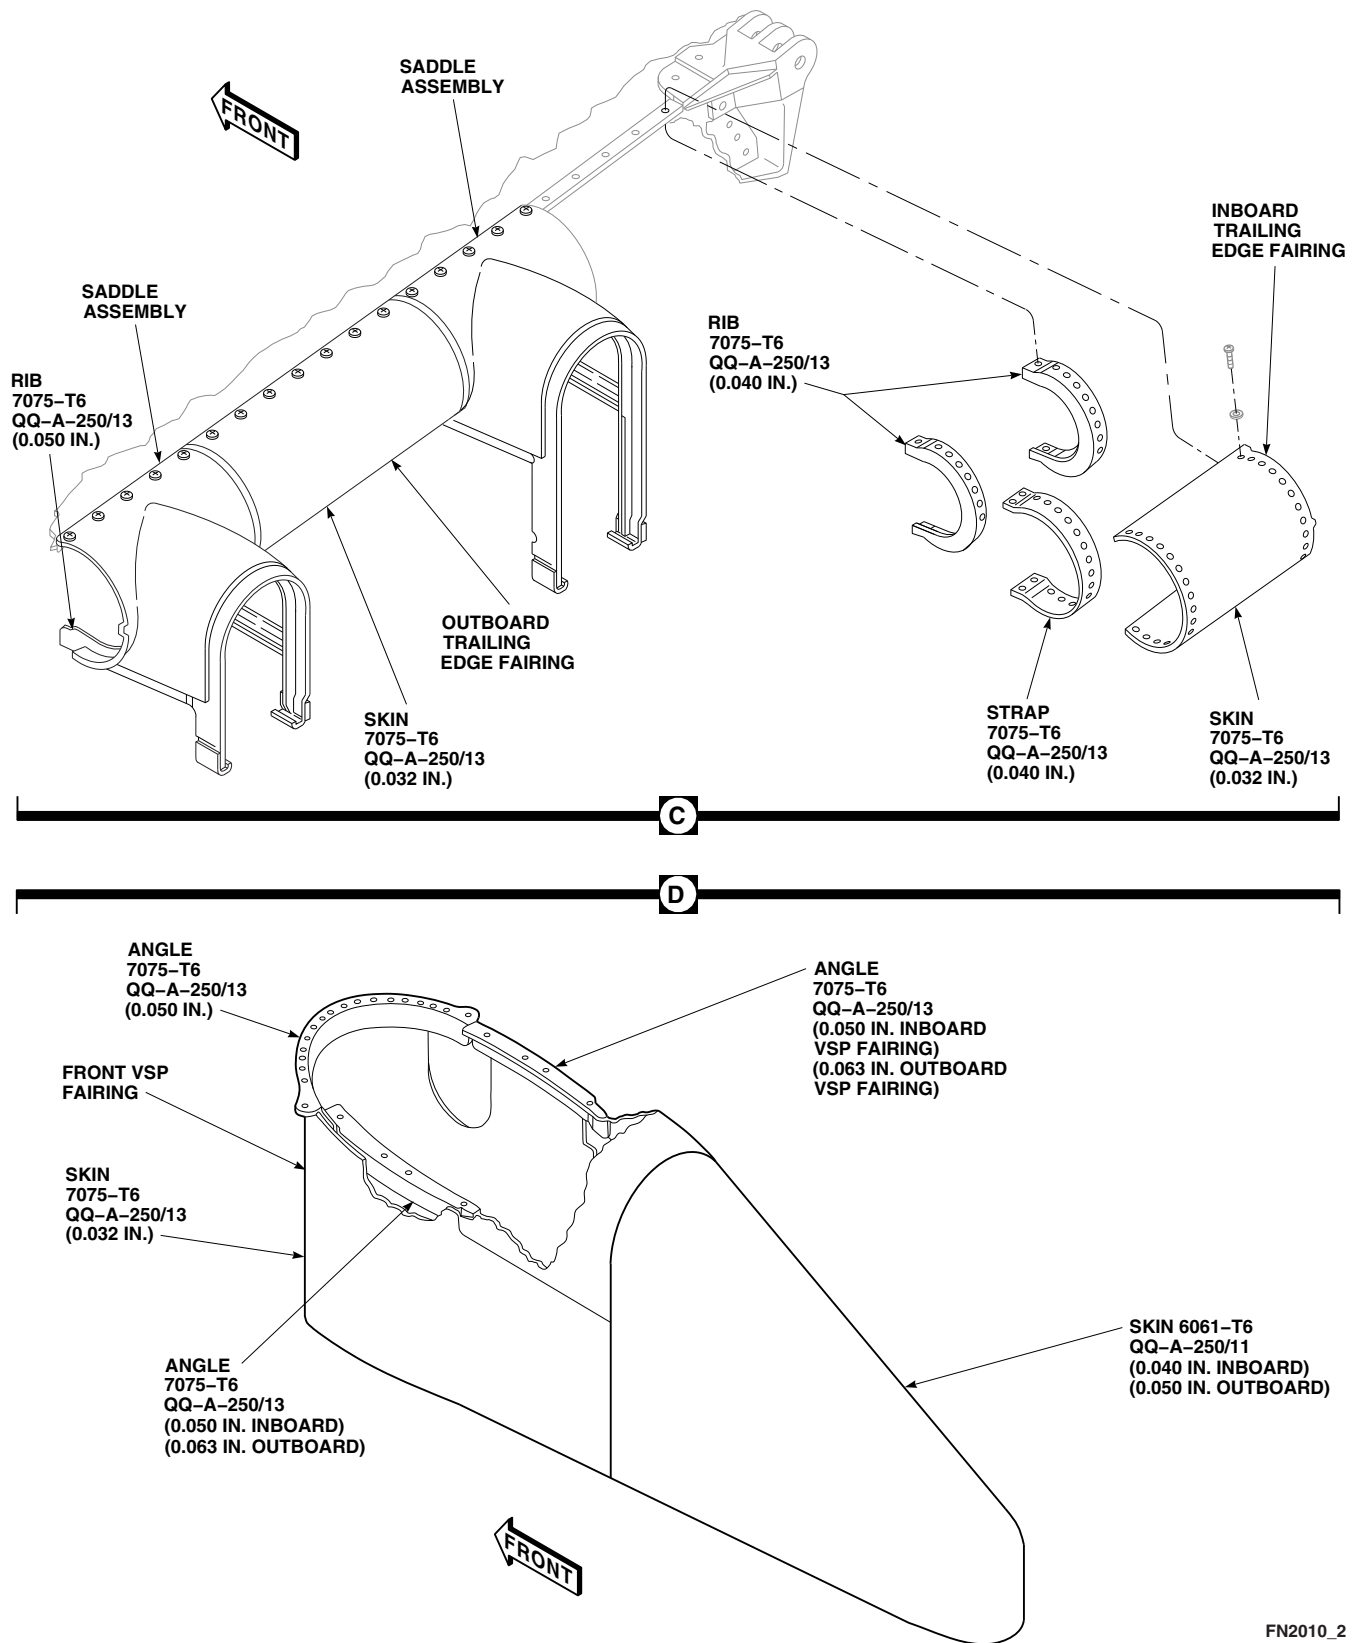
REPAIR ESSS HORIZONTAL STORES SUPPORT (HSS) FAIRINGS
